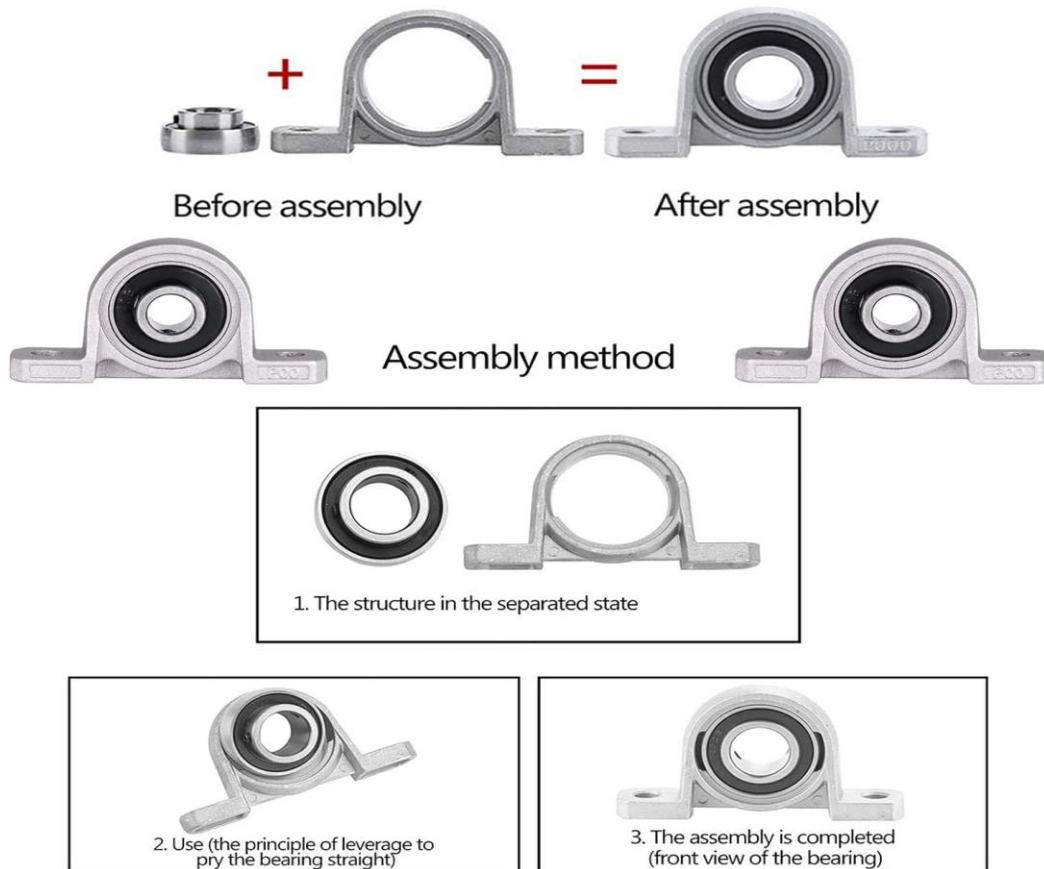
KP000 Ball Bearing Pillow Block Mounted Support.
